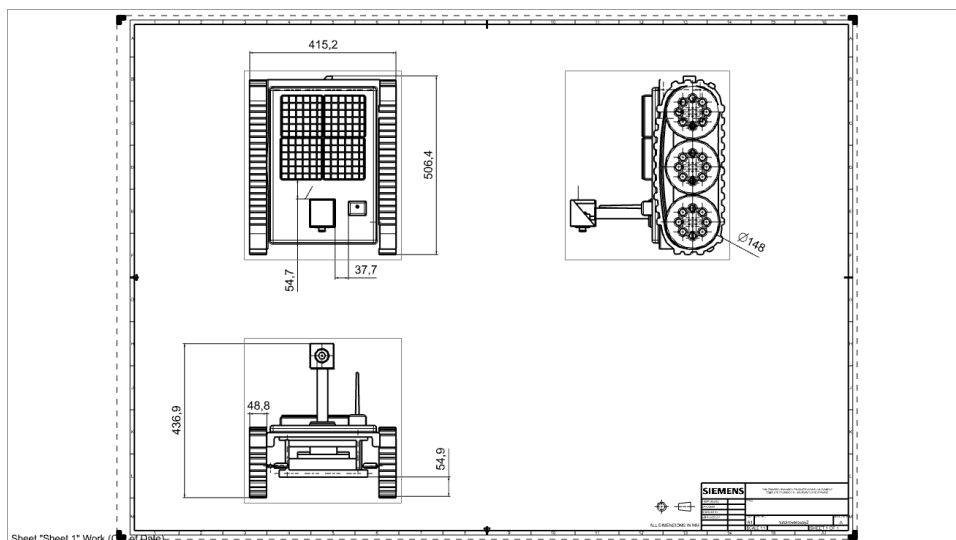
Dimensioned RIAMAR rover CAD (dimensions shown in millimeters).
